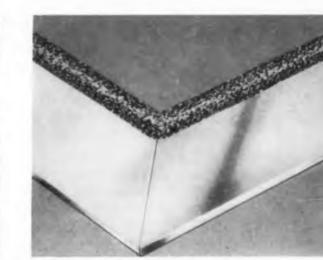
Integrated assembly, combining a knitted-wire gasket strip and mounting frame, facilitates installation.
